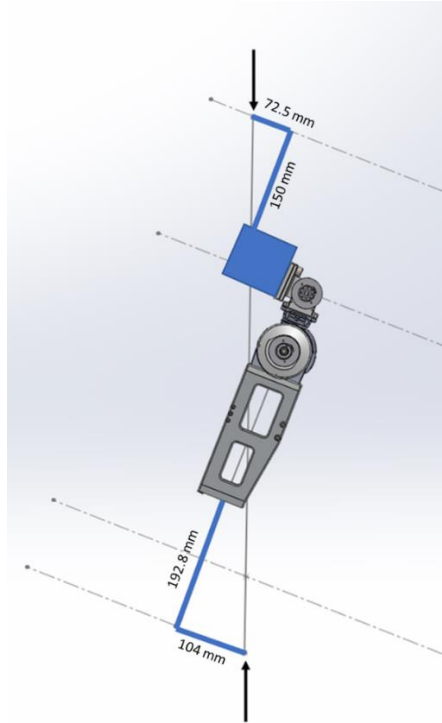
Anterior-posterior mechanical testing setup and dimensions
